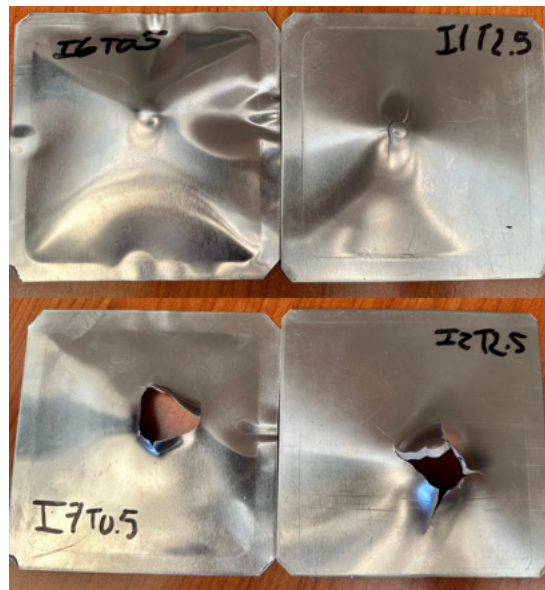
Impacted specimens. Left: Thin specimens. Right: Thick specimens.
